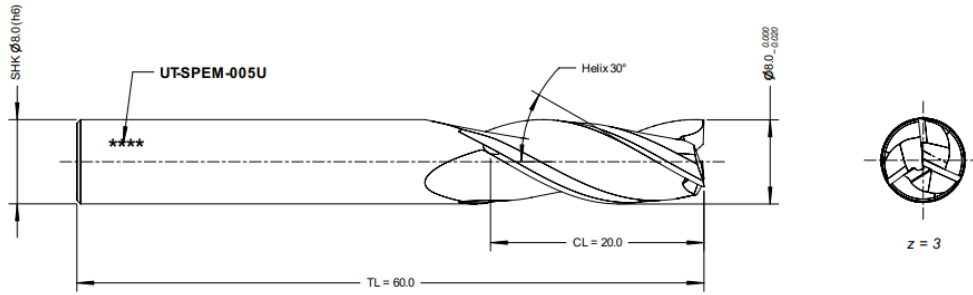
Drawing of end mill carbide with diameter 8mm, 3 flutes and helix angle 30°
